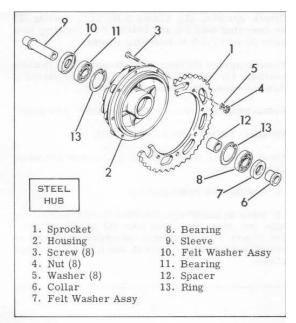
Removing and Installing Rear Wheel Sprocket Assembly - Steel Hub
